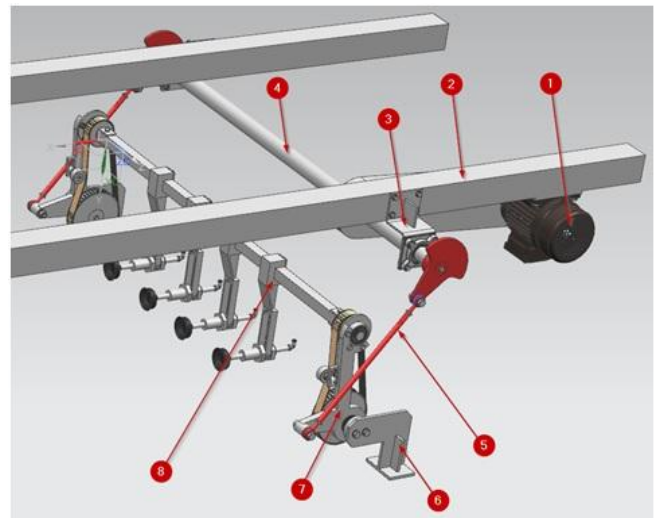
Blank collection system: 1 – electric motor, 2 – main frame, 3 – support of drive shaft, 4 – drive shaft, 5 – pull rod, 6 – support of transmission, 7 – belt transmission, 8 – arm.
